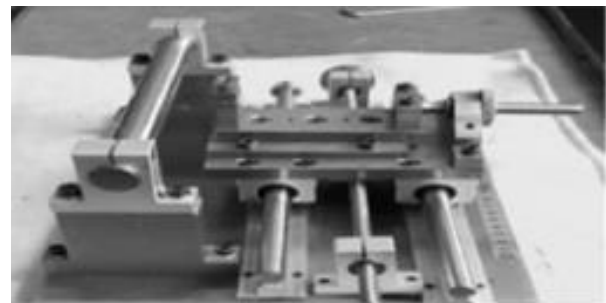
Precision Tapered Workpieces Toll Unit being calibrate for the straightness of the center block.
